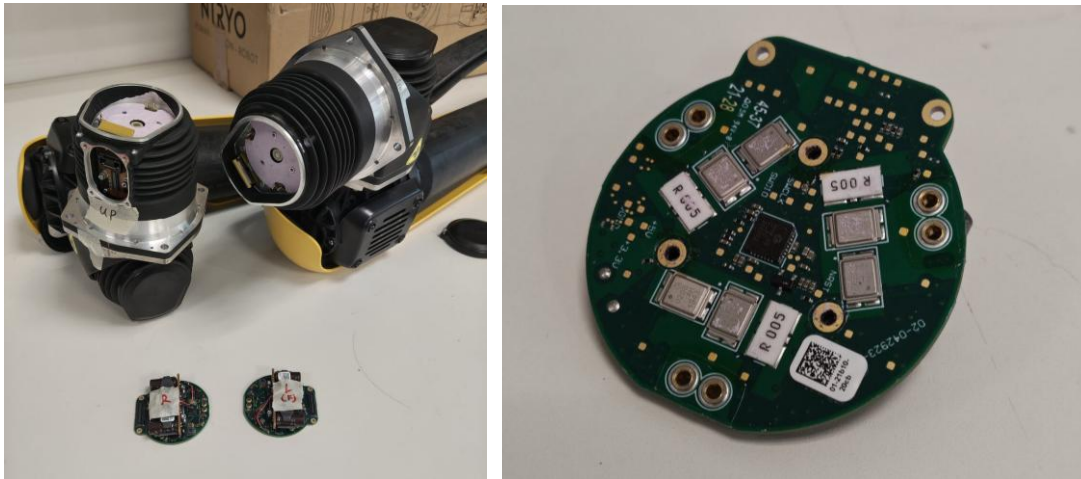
The two hind *hx* motor driver boards removed for direct comparison.
